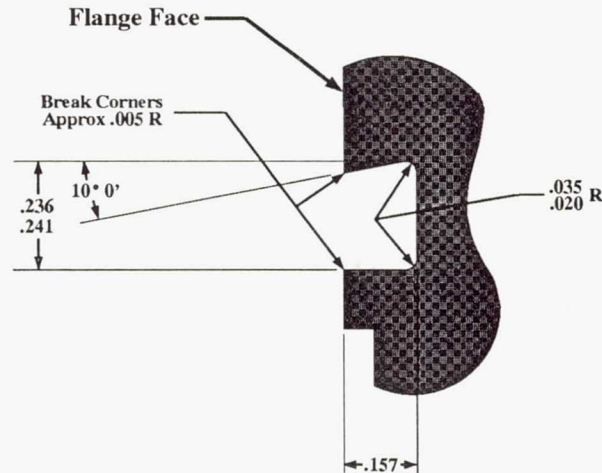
Schematic of o-ring groove design used for flange interfaces. Linear dimensions are given in inches.
